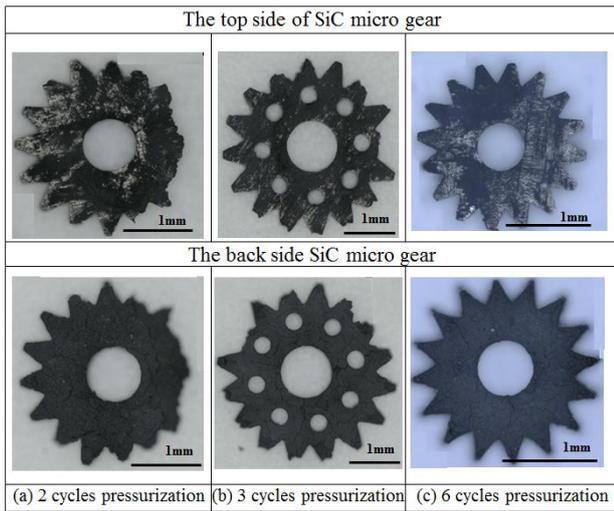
SiC micro gears fabricated by micro slip casting using WC plate with the porosity of 11.1%.
